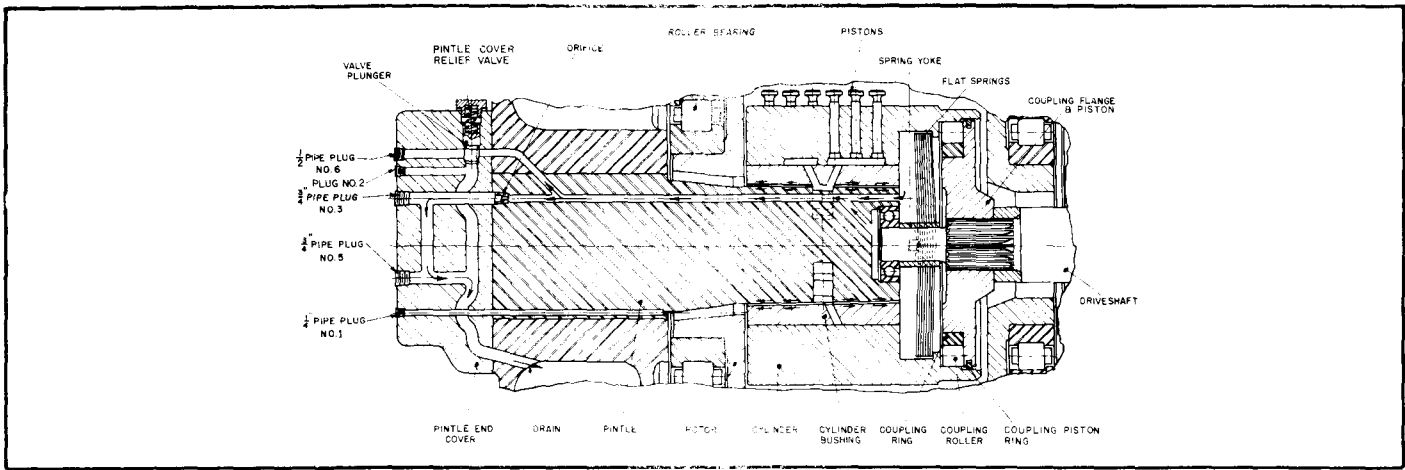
Cylinder Clearance Control DS- 947026-B (49215-B).
